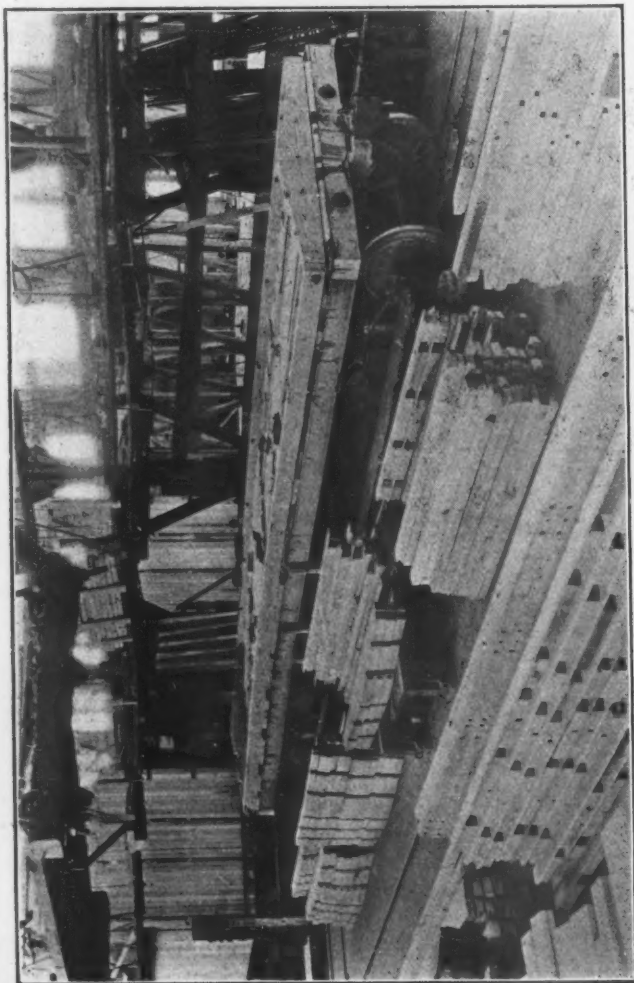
FOURTH STAGE—THE ROOF FRAME IS IN PROCESS OF BUILDING.
